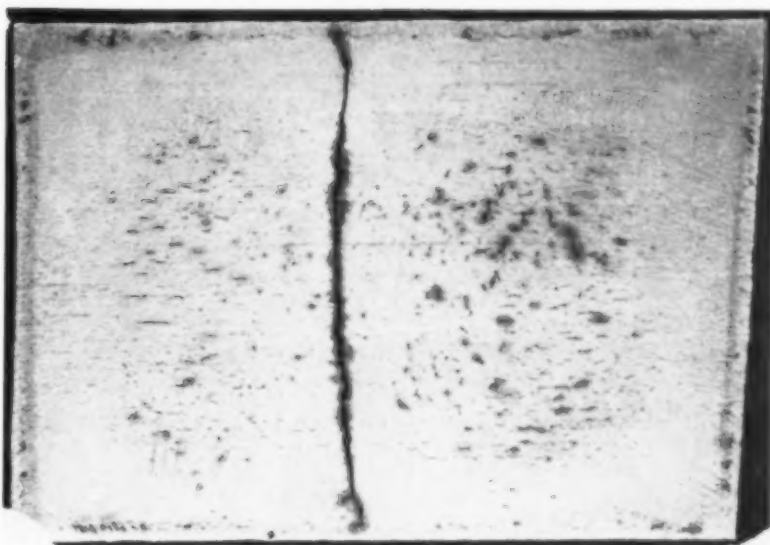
Shatter Cracks in Rail Head (Longitudinal Section, Full Size) Made From Steel That Had Been Blown With Hydrogen While Molten. Photo courtesy R. E. Cramer
